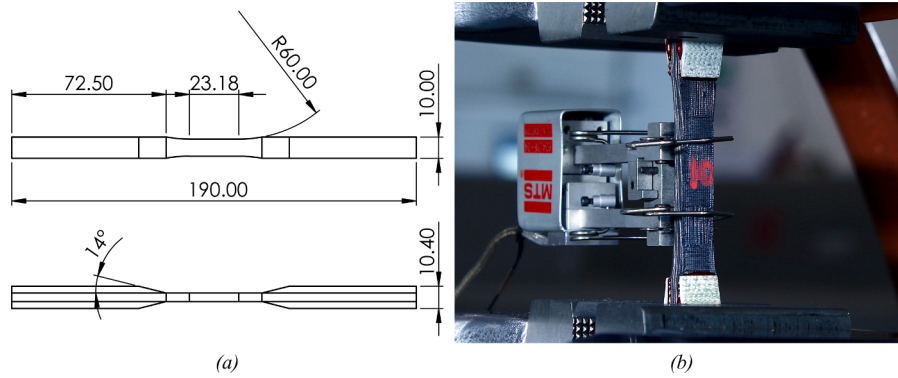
(a) Tensile specimen geometry and (b) example of specimen under testing.
